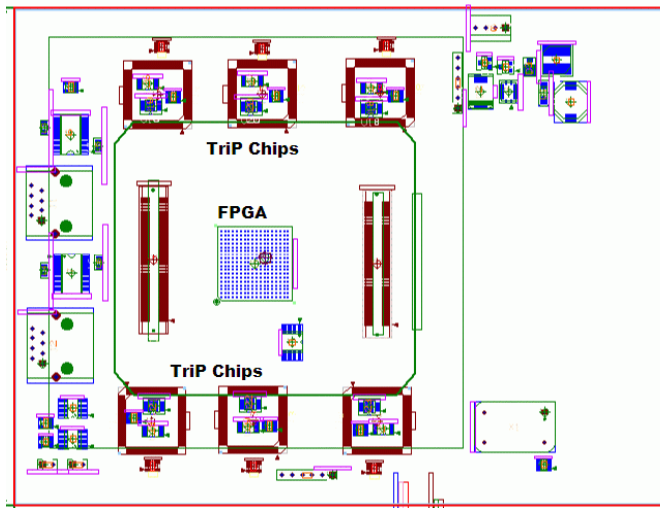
Simplified schematic of the front end electronics 2nd prototype board.
